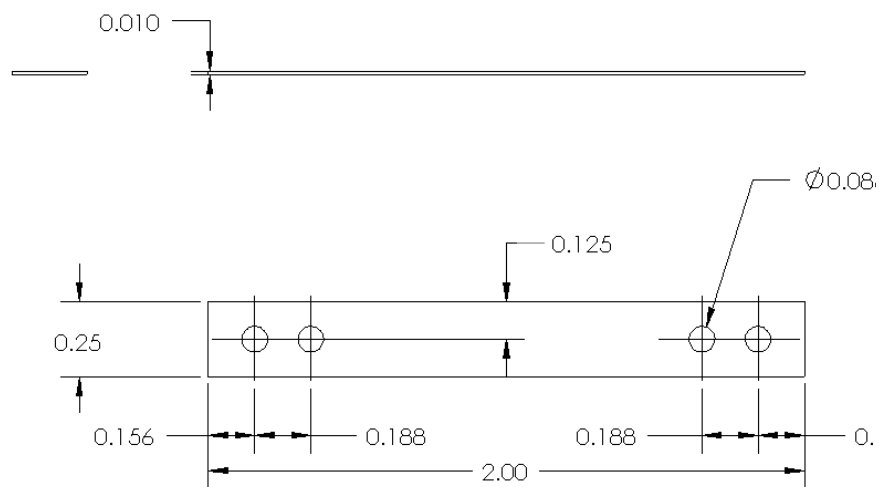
Dimensions of the sensing element in the shear strain extensometer. All dimensions are in inches.
